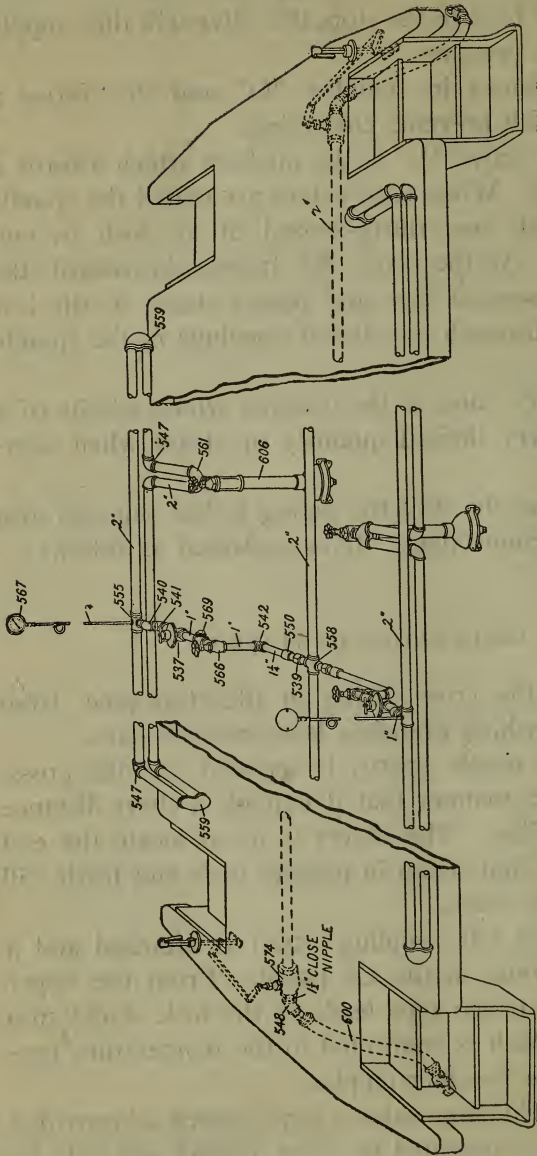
GOLD'S IMPROVED DIRECT SYSTEM FOR HEATING PASSENGER CARS.
